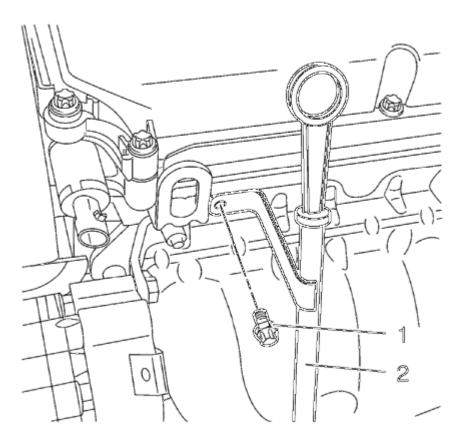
Oil Level Indicator Tube And Bolt Courtesy of GENERAL MOTORS COMPANY
